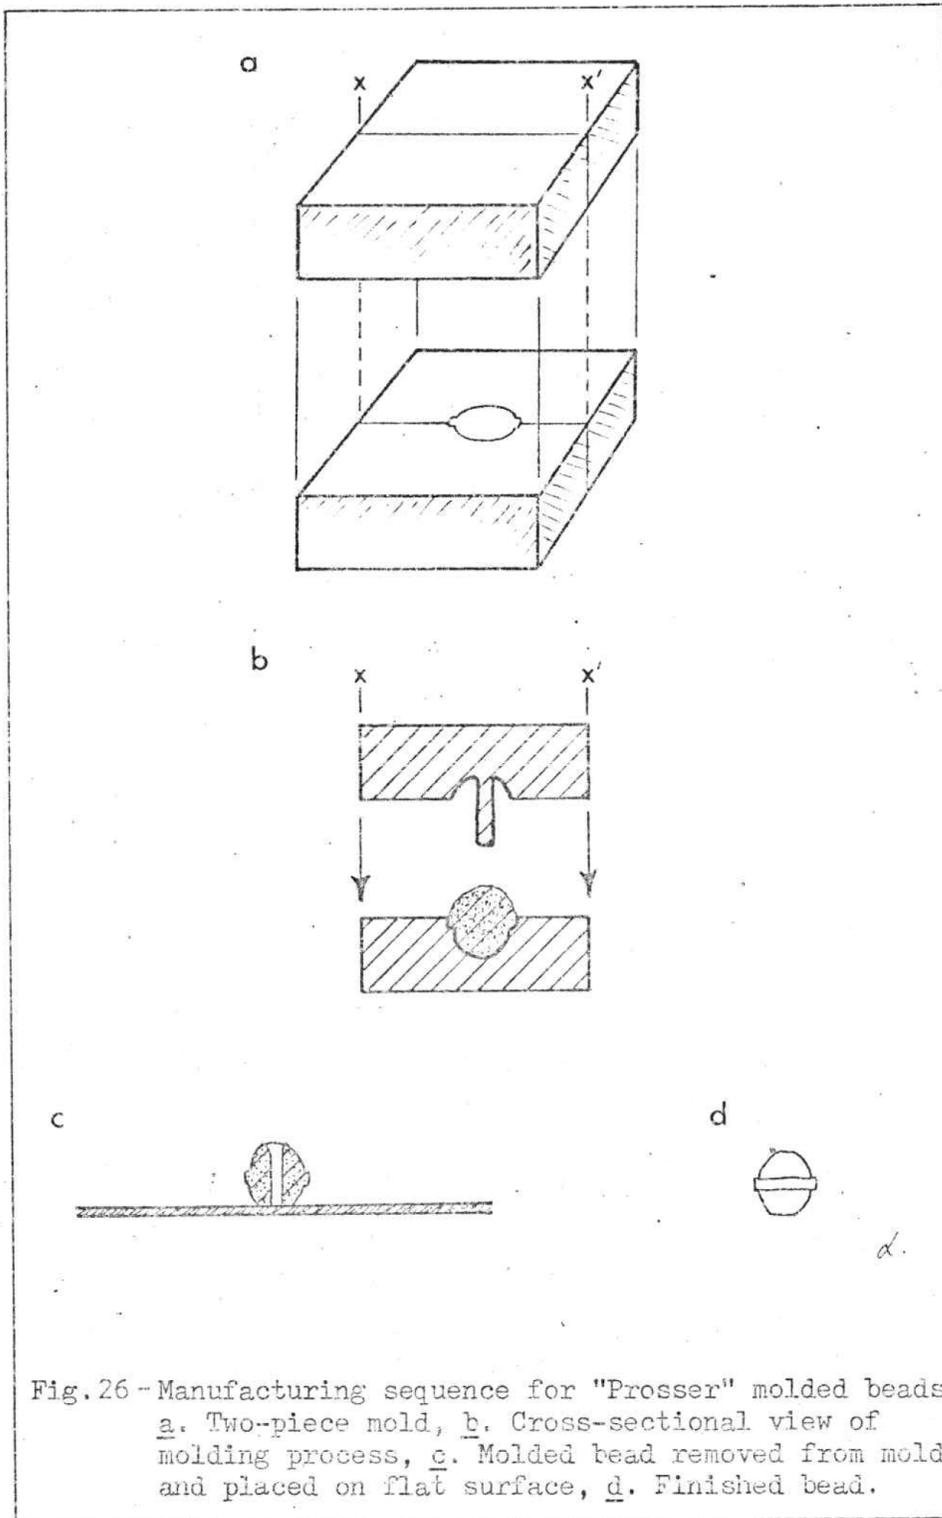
Manufacturing sequence for "Prosser" molded beads
